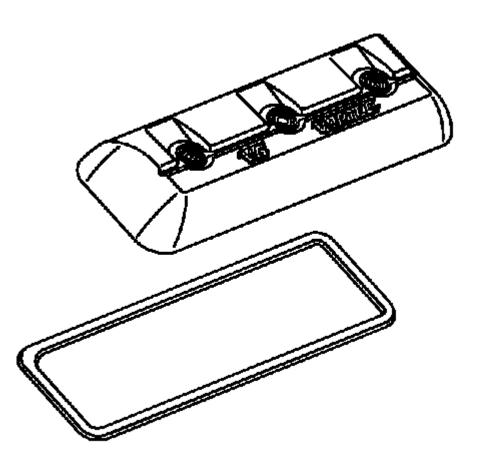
View Of Rocker Arm Cover And Gasket Courtesy of GENERAL MOTORS CORP.
